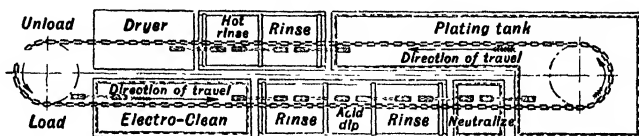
Plan view of a plating machine. (Courtesy The Meaker Company.)
